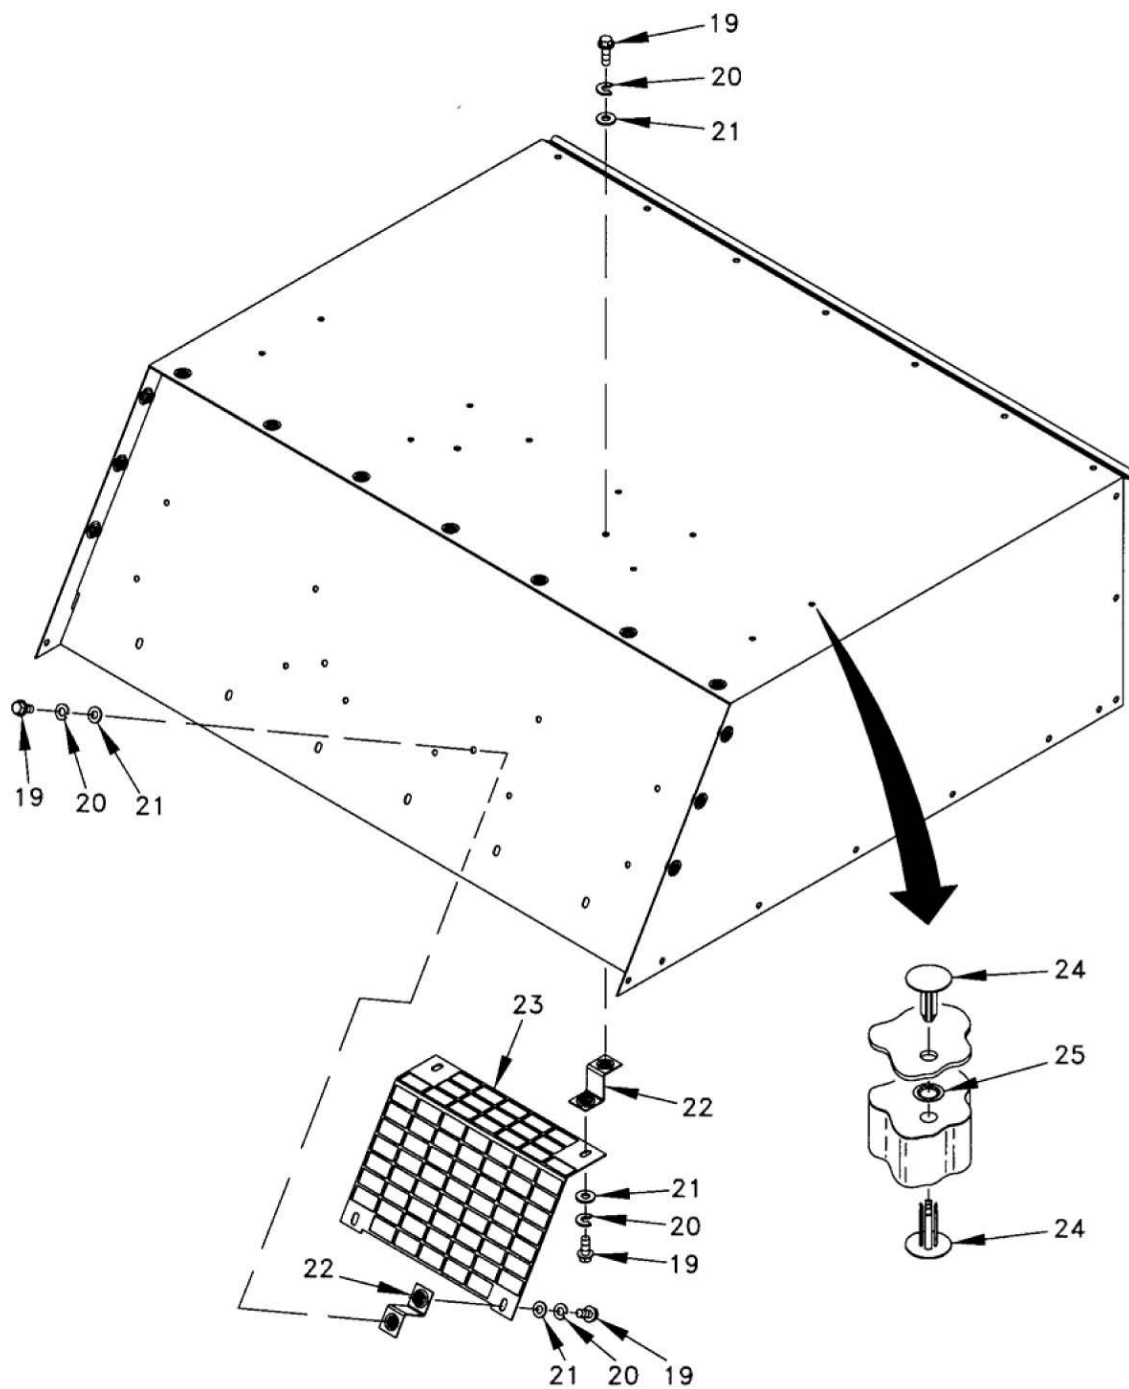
Rear Roof Section Housing Assembly (Sheet 1 of 2).
